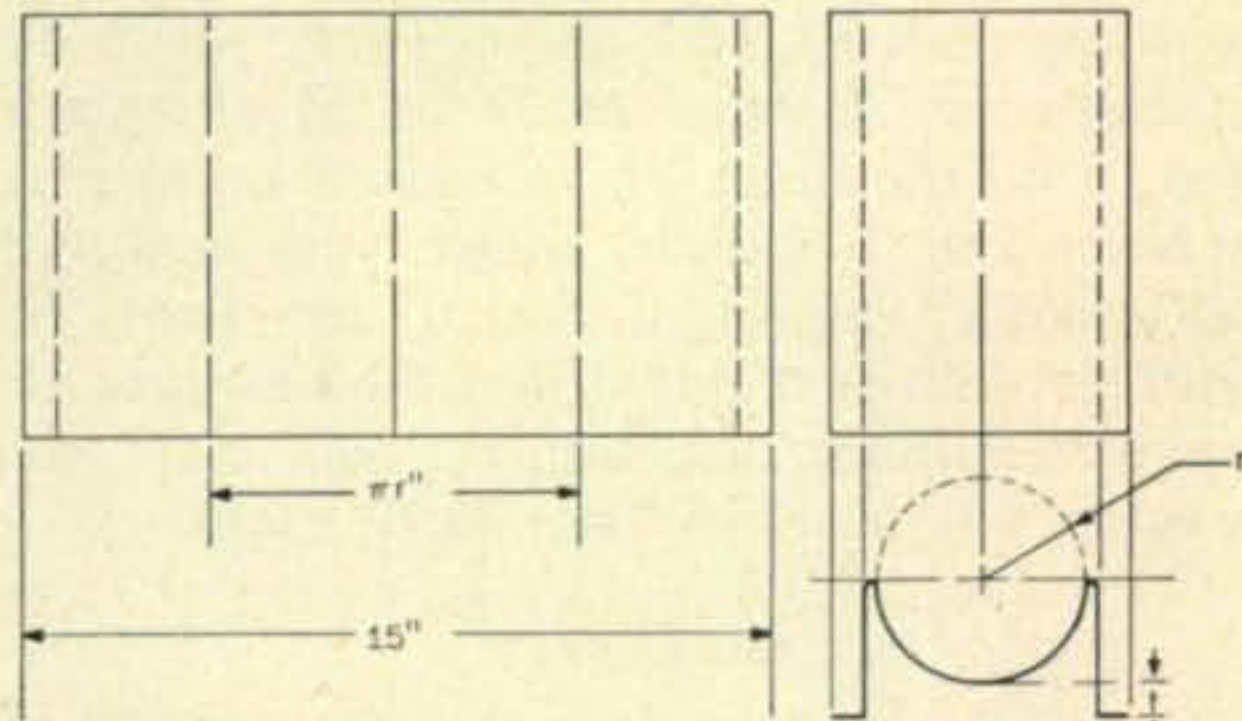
Details for constructing a "lazy M" mount to hold the generator. Dimension t is explained in the text.
